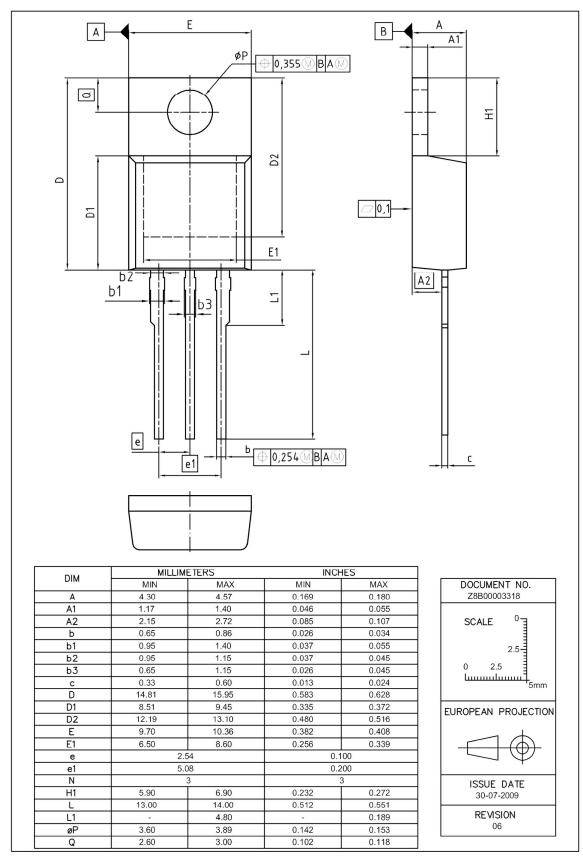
Outline PG-TO 220-3, dimensions in mm/inches
